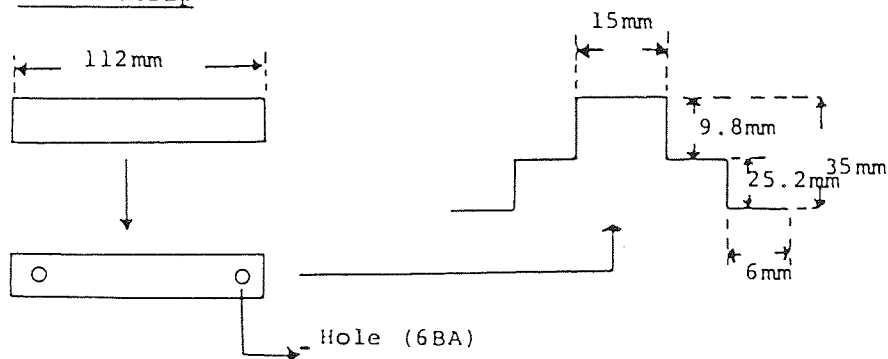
(a): Prototype 3; Construction of brass "T" piece for compressional fittings;
